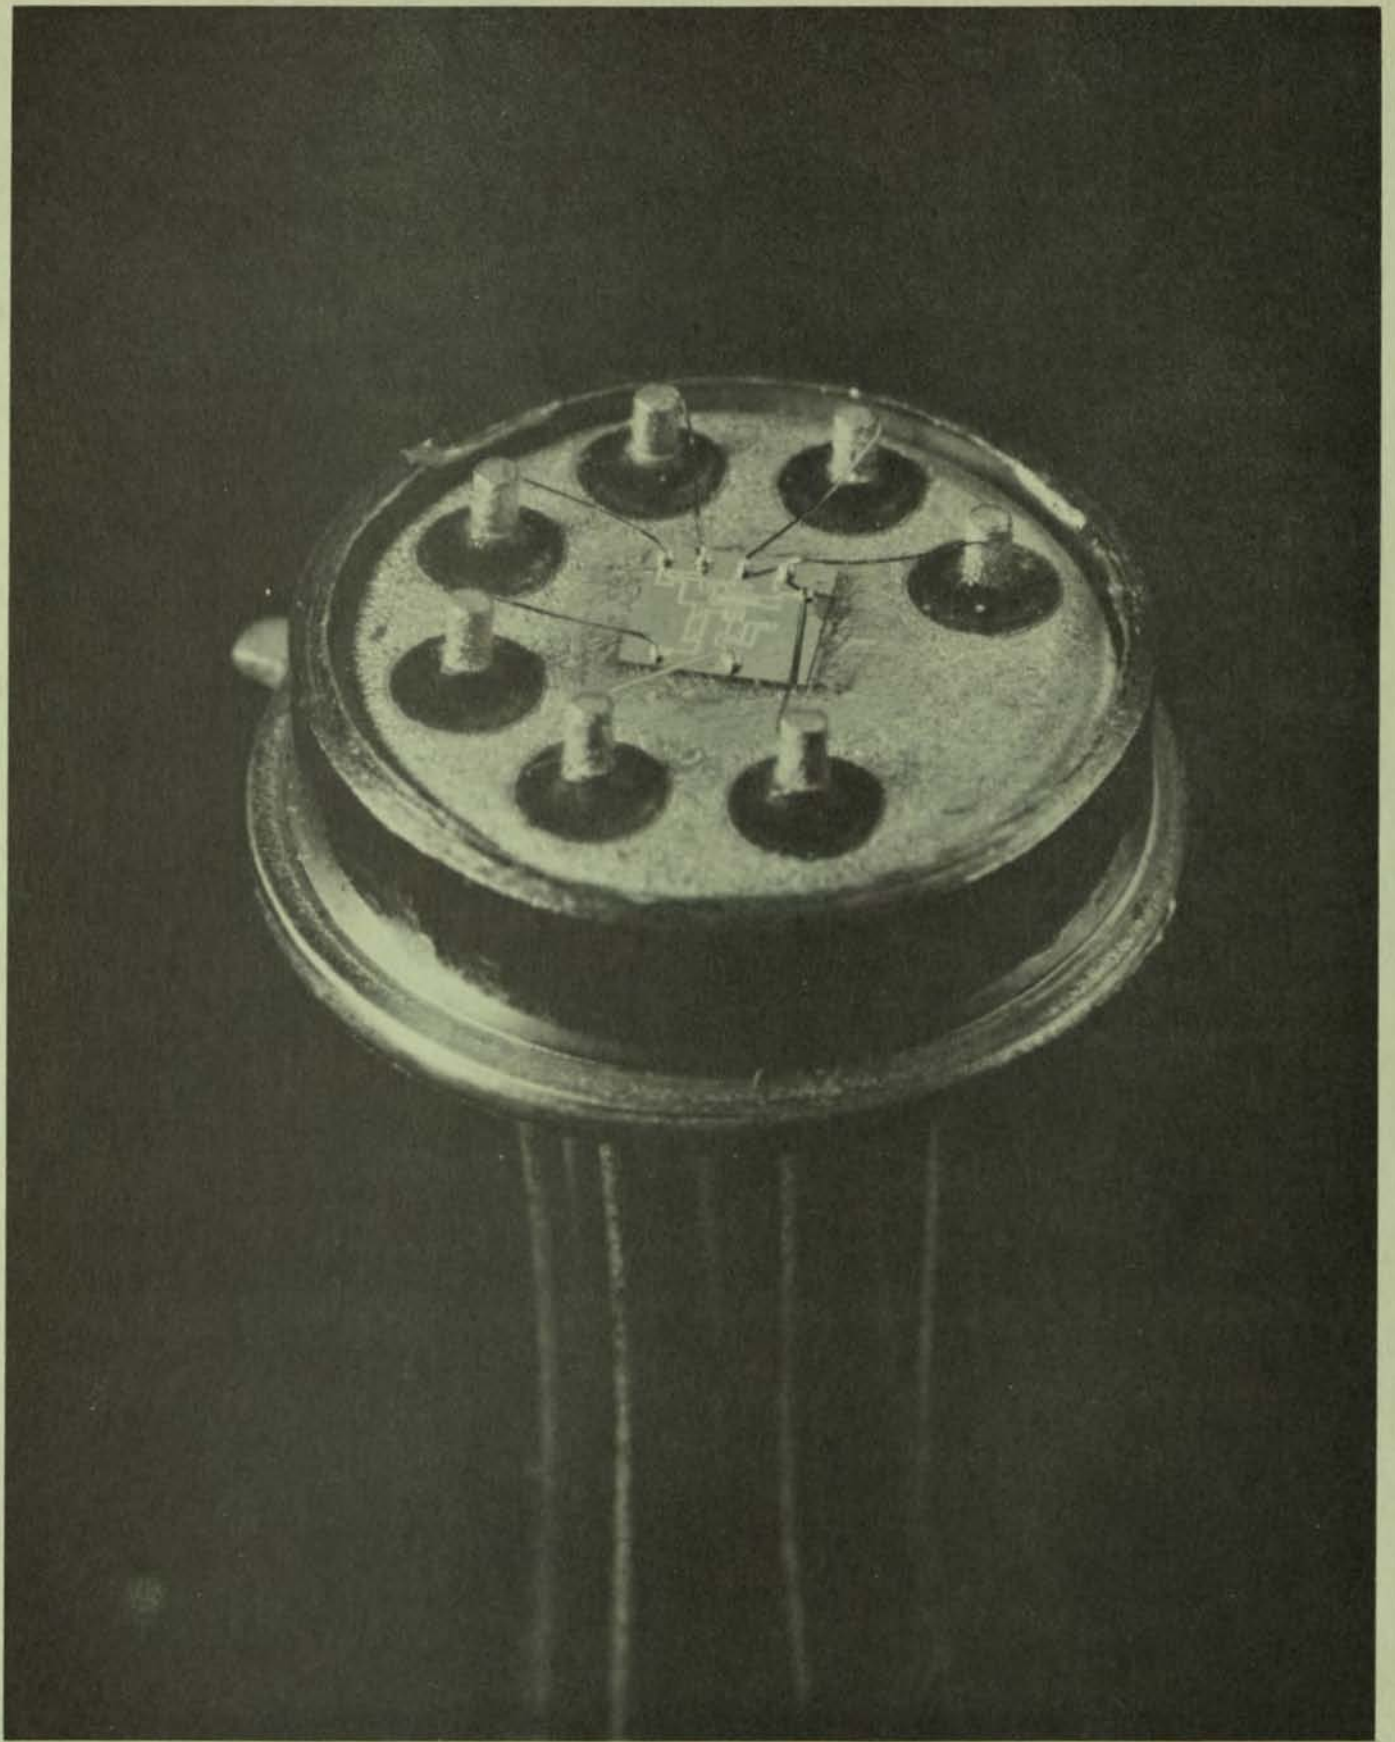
Microcircuit mounted upon an eight lead transistor type header. The eighth lead is spot-welded to the bottom of the metal eyelet. The top of the can has been cut away.
